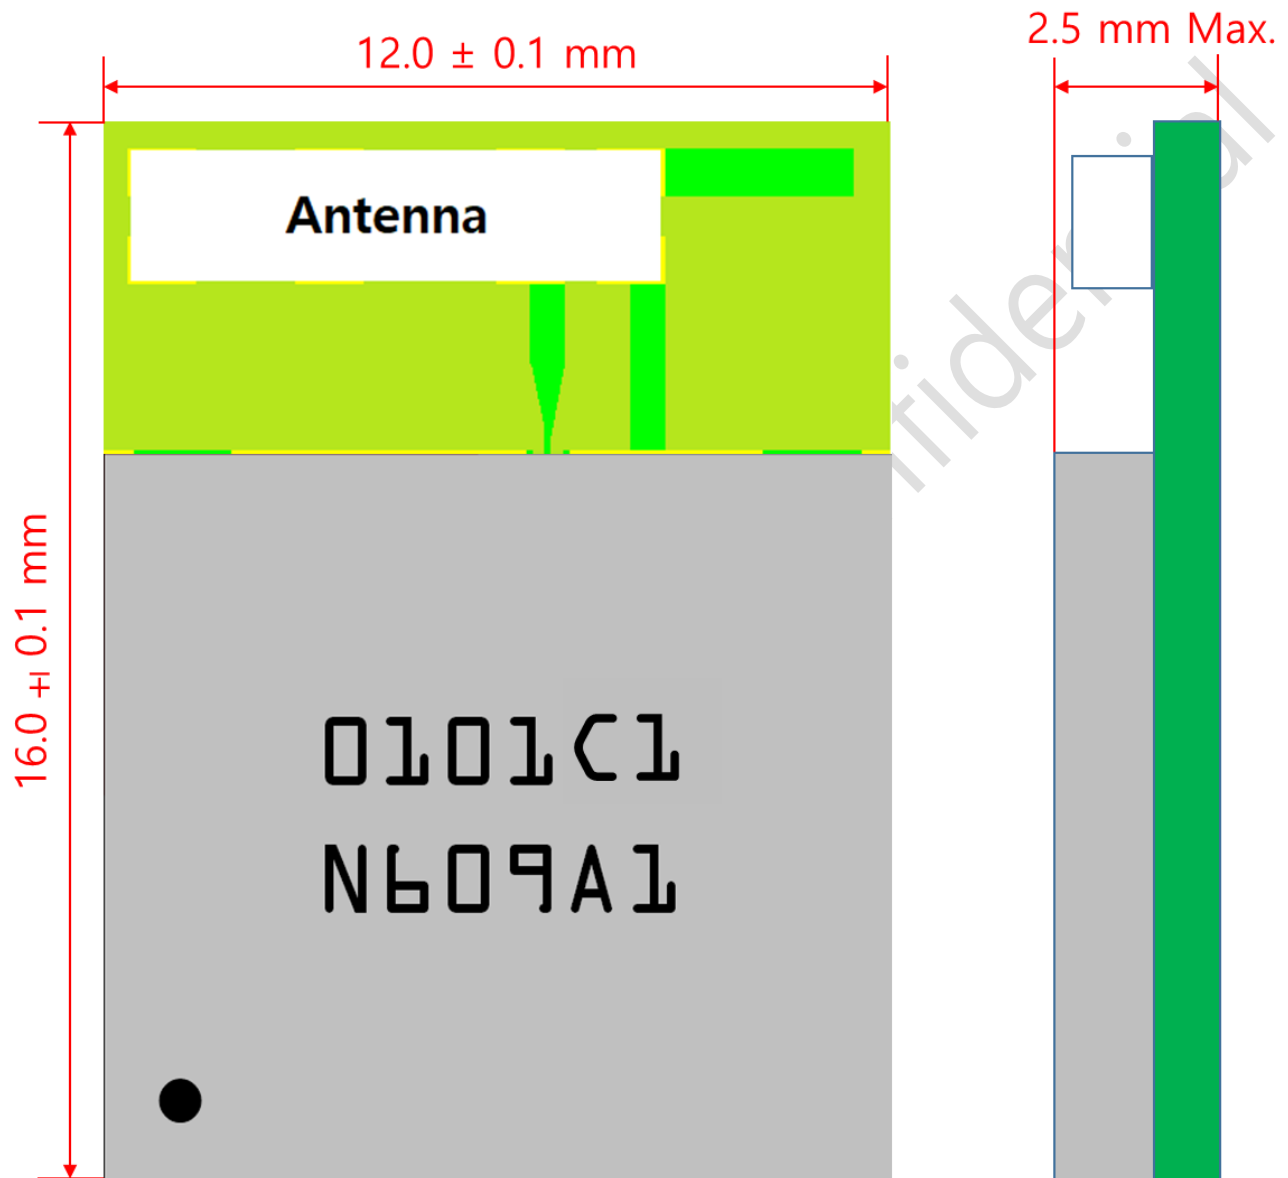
HWL-C21A Mechanical Dimension (Top & Side view)
